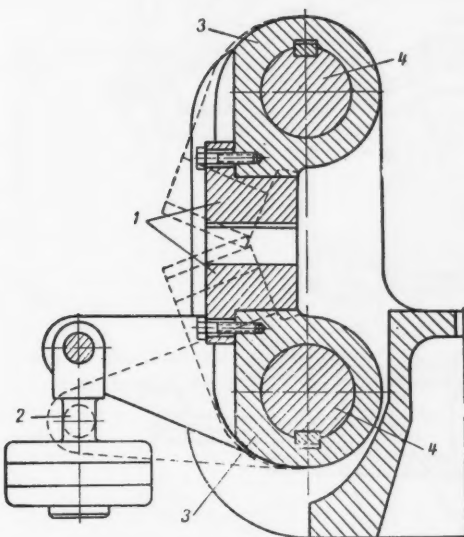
Die-block. 1) Jaws; 2) counterweight; 3) cranks; 4) shafts.
